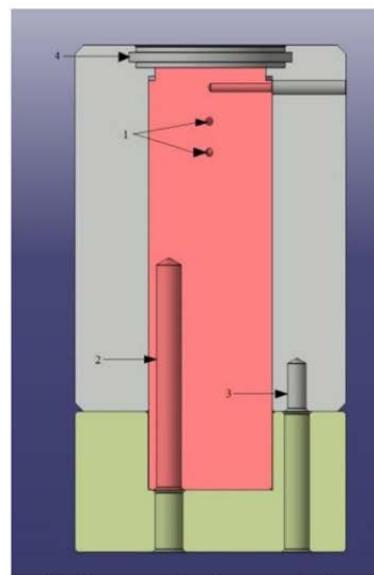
The assembled heater and insulator set: 1- thermocouples place,
